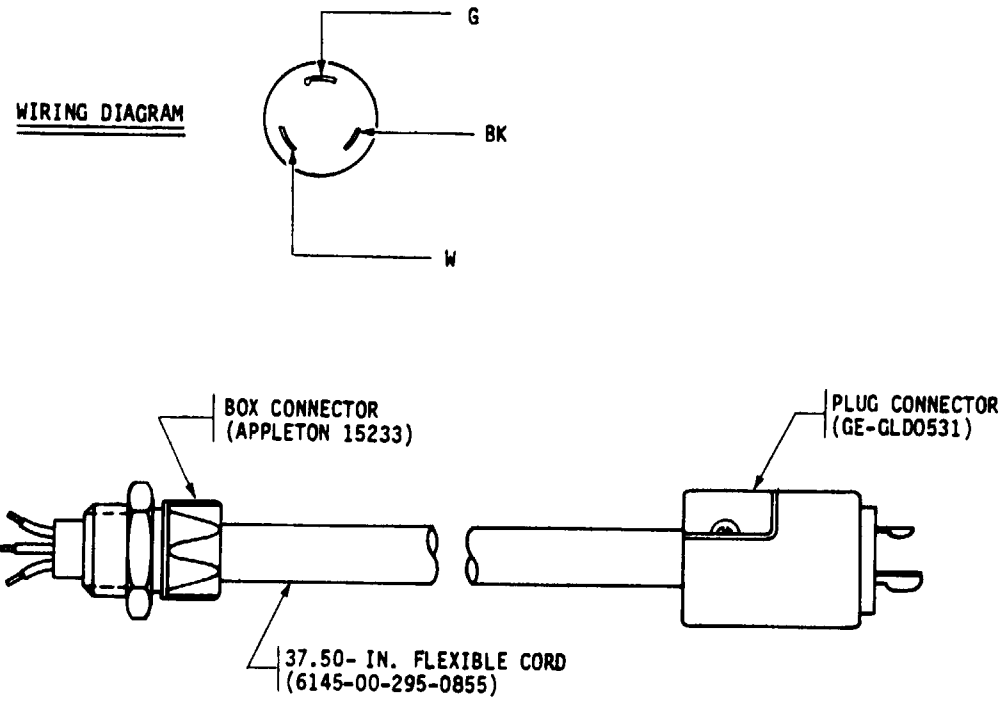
Power Cable Assembly, 11021165, Units 2 and 3, M35A2.
